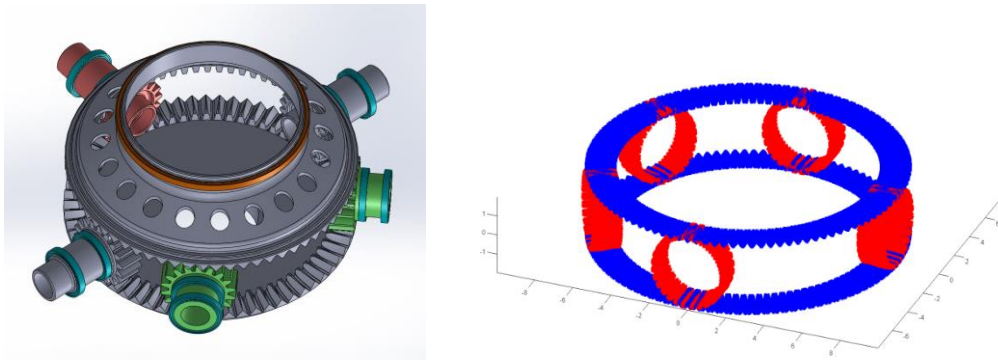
a) Example 3D model b) Produced tooth geometries
